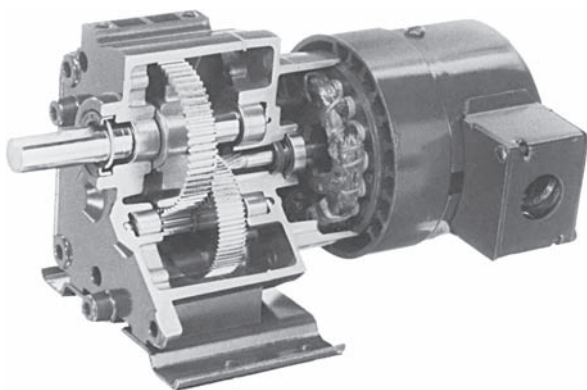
Double-reduction spur gear reducer (Bison Gear & Engineering Corporation, St. Charles, IL)
